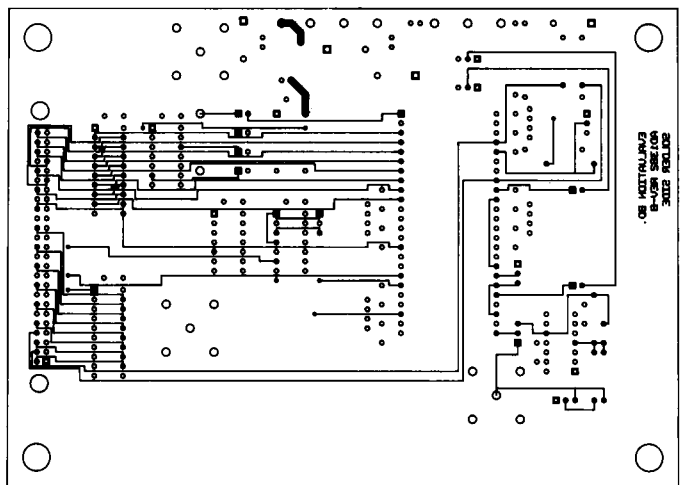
AD1382 Evaluation Board Layout, Layer 4 (Solder Side)
